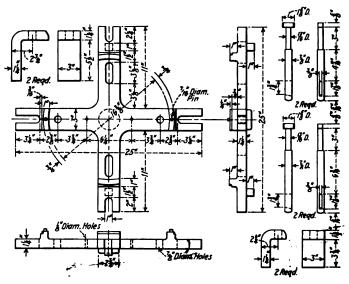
Jig for Turning and Boring Eccentric Strap Bushings
